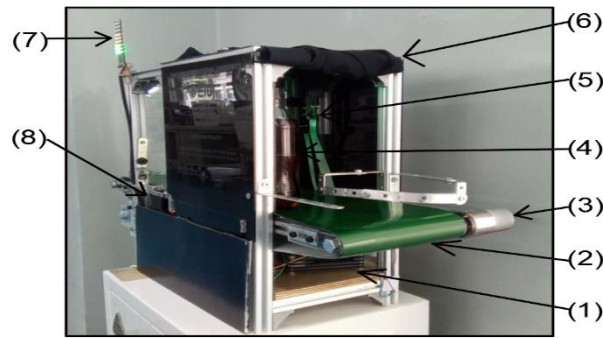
A full prototype of bottle inspection system. (1) Raspberry Pi 4 controller. (2) Belt conveyor. (3) Conveyor motor. (4) Testing bottle. (5) Camera module and illumination board. (6) Inspection zone. (7) Indicator of the classification result (8) Sorting mechanism.
